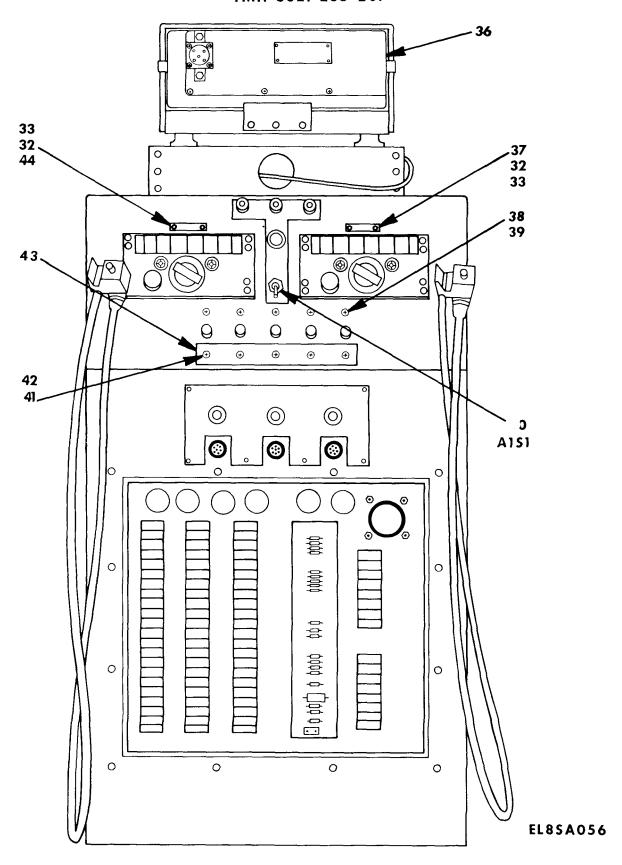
FRAME ASSEMBLY VI &V2. (SHEET 40F4)
